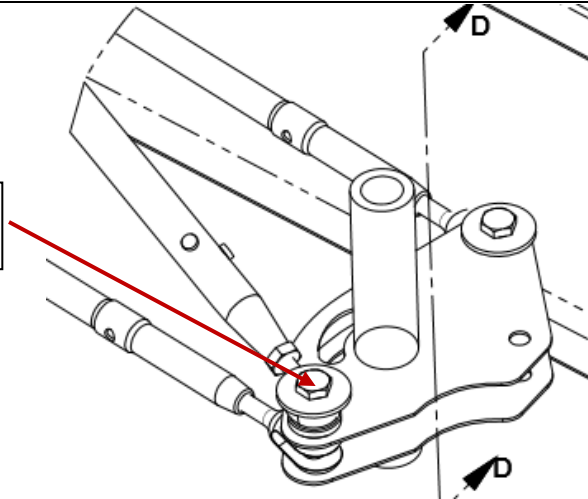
AILERON BELLCRANK INSTALLATION
